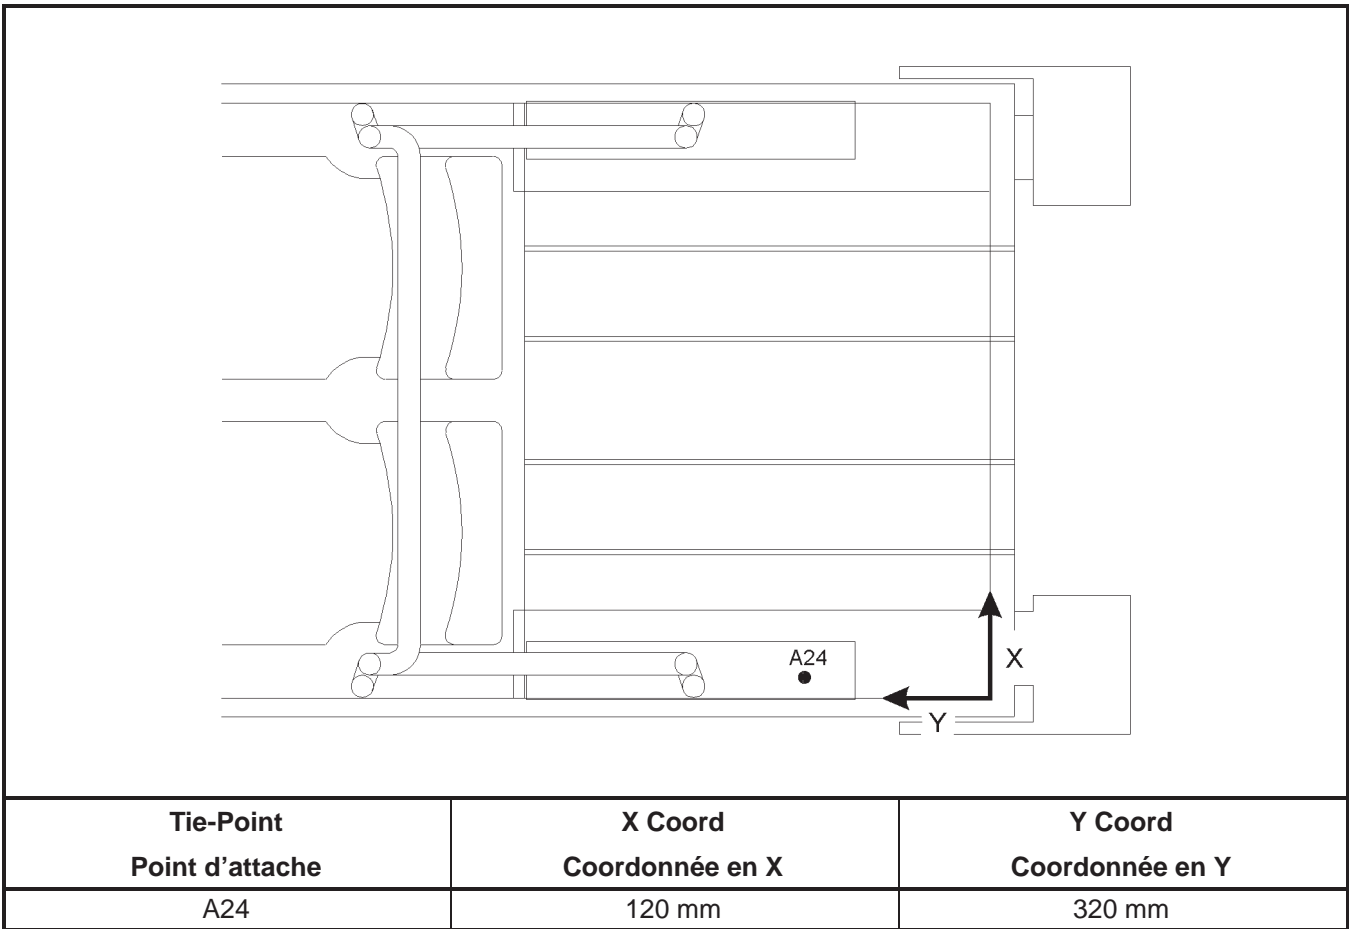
Installation of Cable Tie-Points in Cargo Bed – AC97
